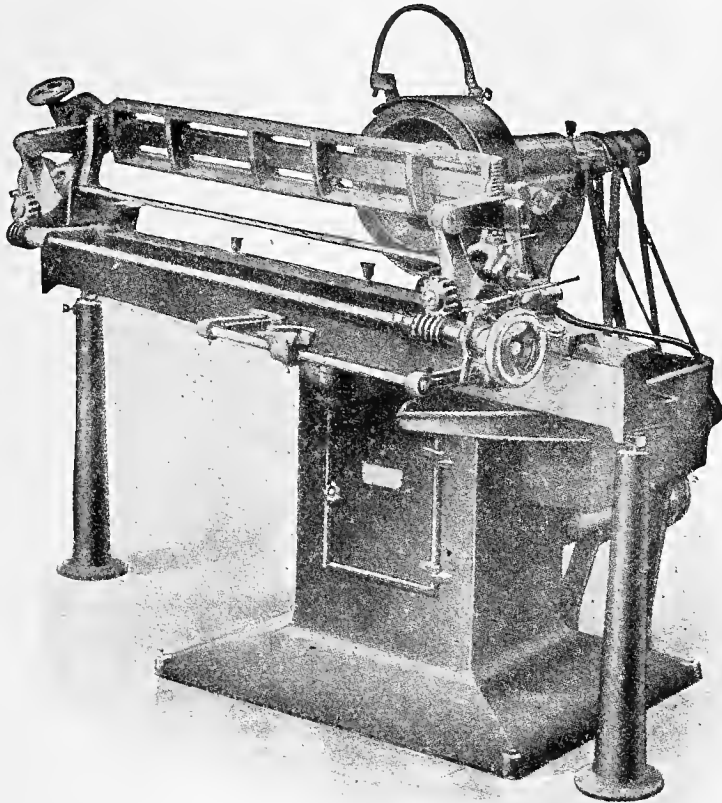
AUTOMATIC KNIFE SHARPENER OR GRINDER.
